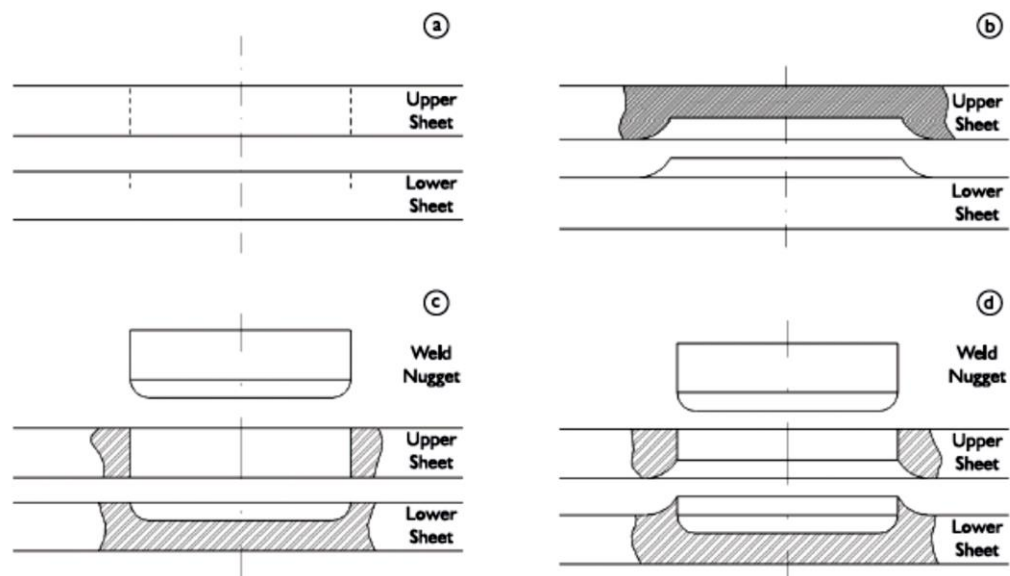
The geometric features of the welded joint: (a) indistinct weld nugget without a hook, (b) indistinct weld nugget with a hook, (c) distinct weld nugget without a hook and (d) distinct weld nugget with a hook (Campanelli, et al., 2013b).
